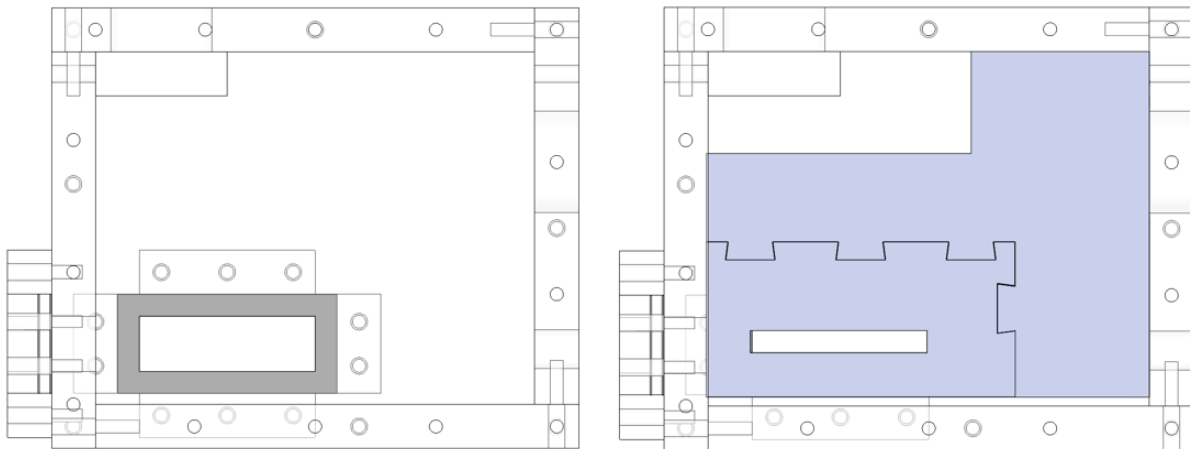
Side views of the impingement chamber without (left) and with (right) the modular nozzle assembly in place
